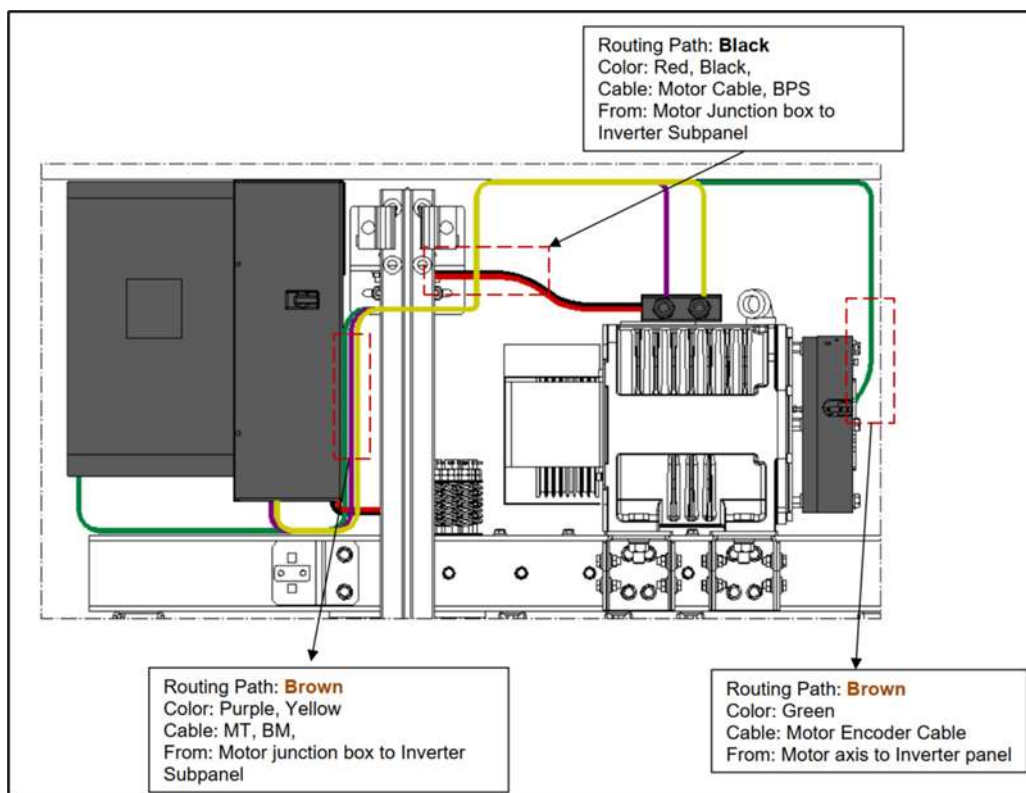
Detailed routing definition for motor and inverter cable installation paths used in the revised cable calculation methodology.
